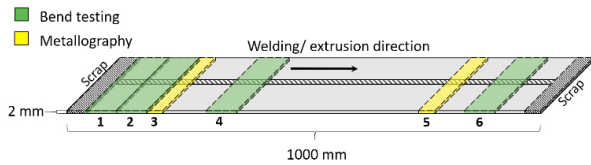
Sketch showing the location of the different samples used for metallography (yellow) and bend testing (green) referred to the start position of the weld.
